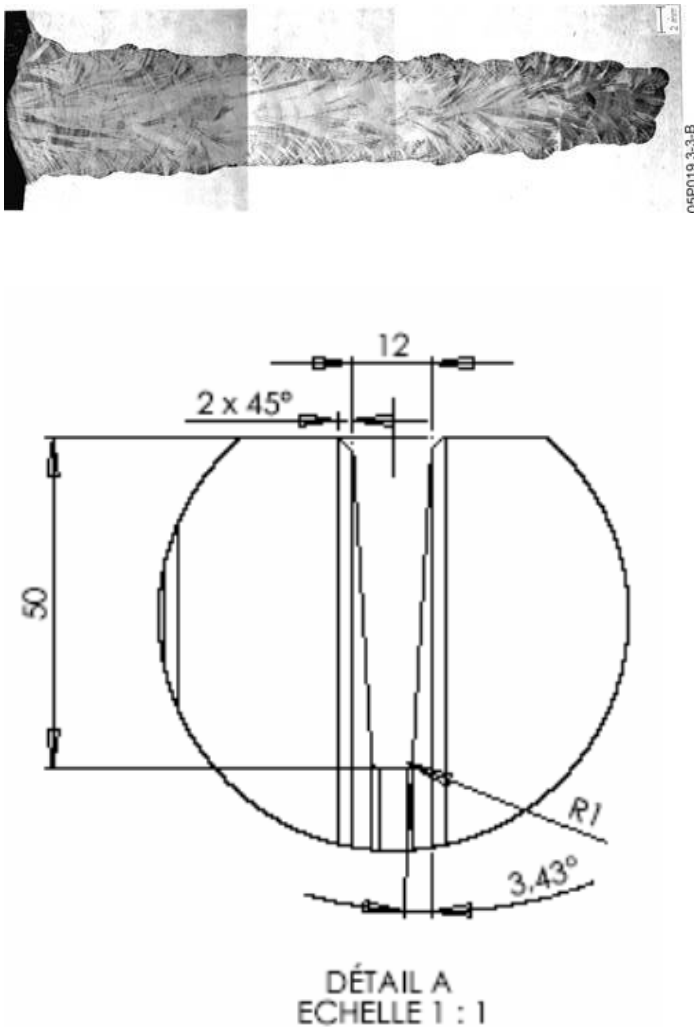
Hybrid welding on 50mm depth chamfer
